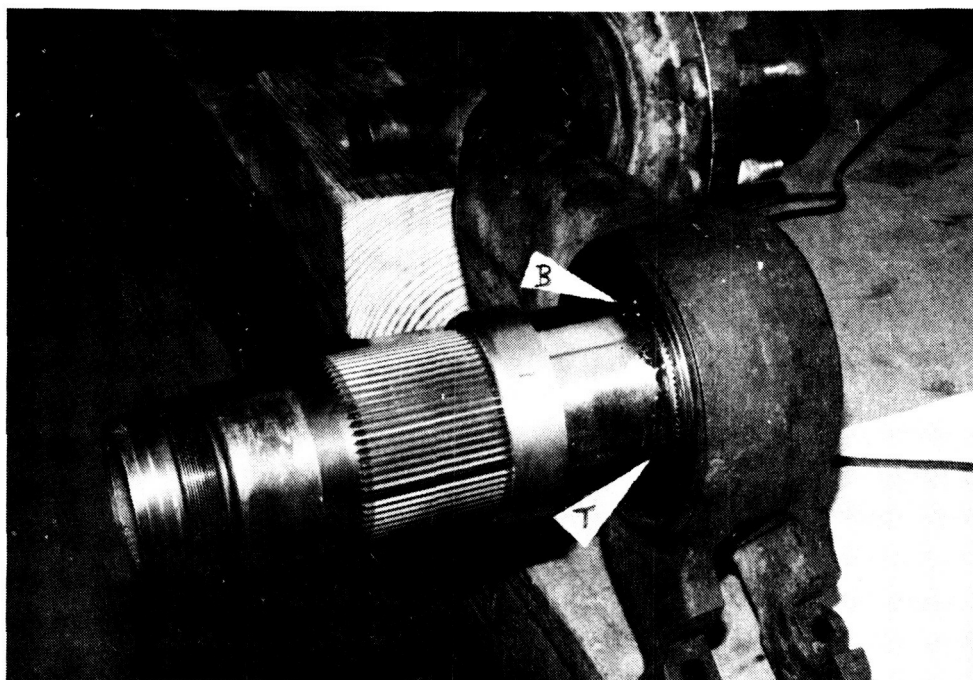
Road Arm Torsion and Bending Strain Gage Locations
